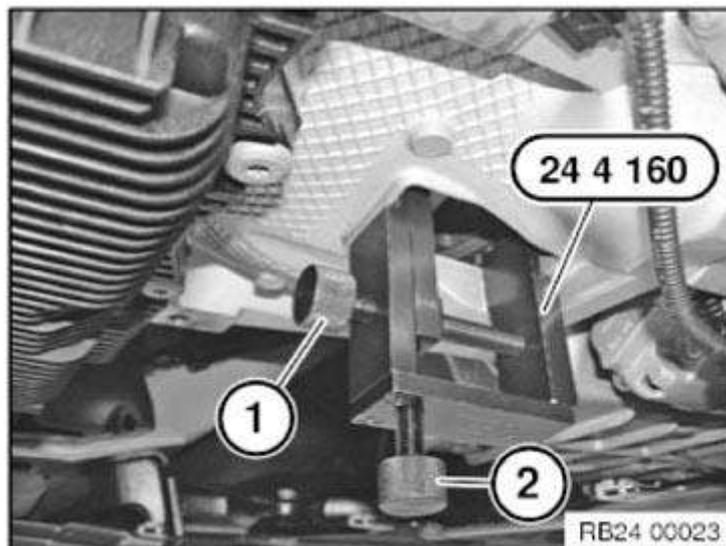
Inserting Special Tool 24 4 160 Into Recess Of Transmission Housing
